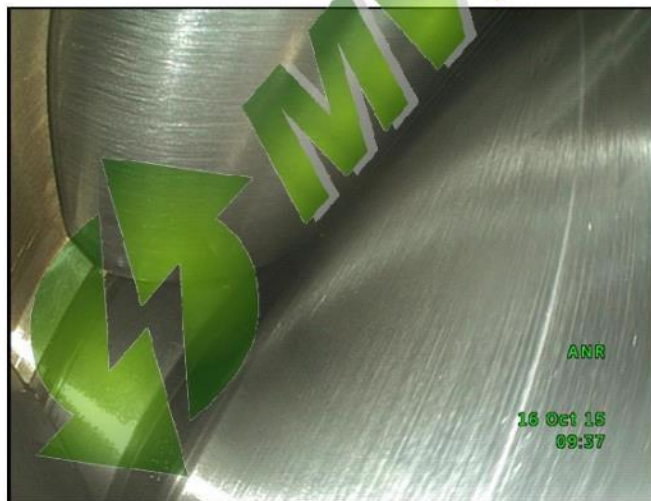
shows the bearing of the third planet wheel. No irregularities.
